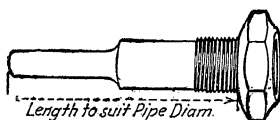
b*.—Separable socket for thermometer shown in Fig. 40*a*.
